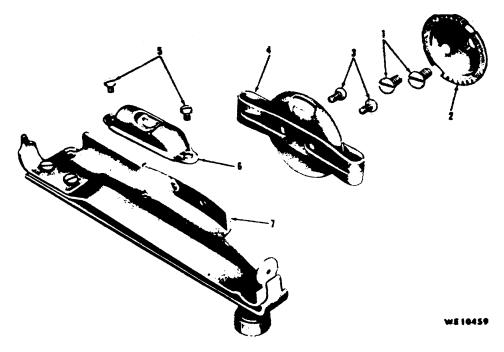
Grenade launcher sight, M15 - exploded view. WE 10456
